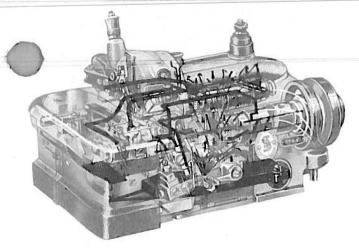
X-ray View of Class 246K Machine (Lubricating System Shown in Solid Black)
